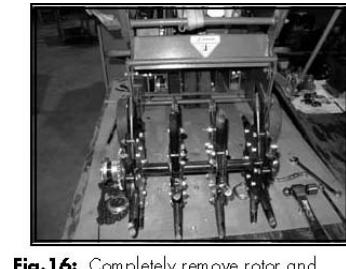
Completely remove rotor and set aside with drive chain and other components for re-installation
